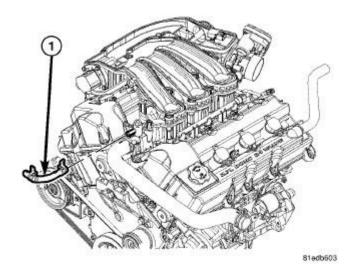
Oil Cooler Lines Courtesy of CHRYSLER LLC
